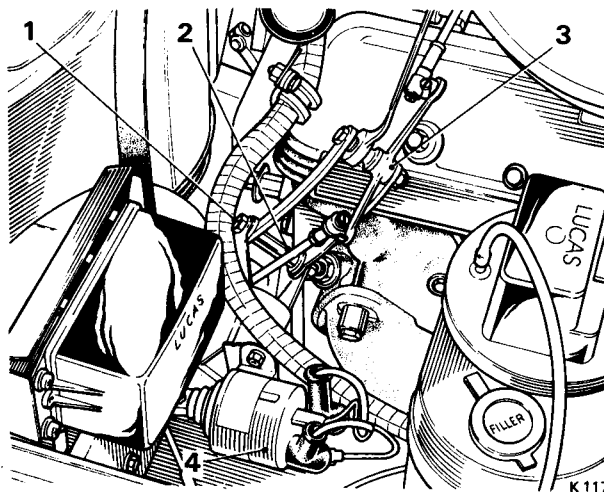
COMPENSATOR LINKAGE AND REMOTE STARTER MOTOR SWITCH (Early Cars)
